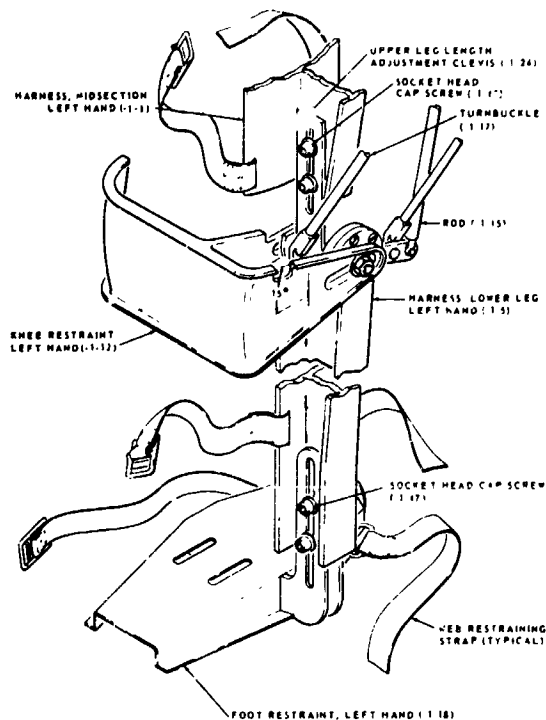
ADJUSTING HARNESS ASSEMBLY
